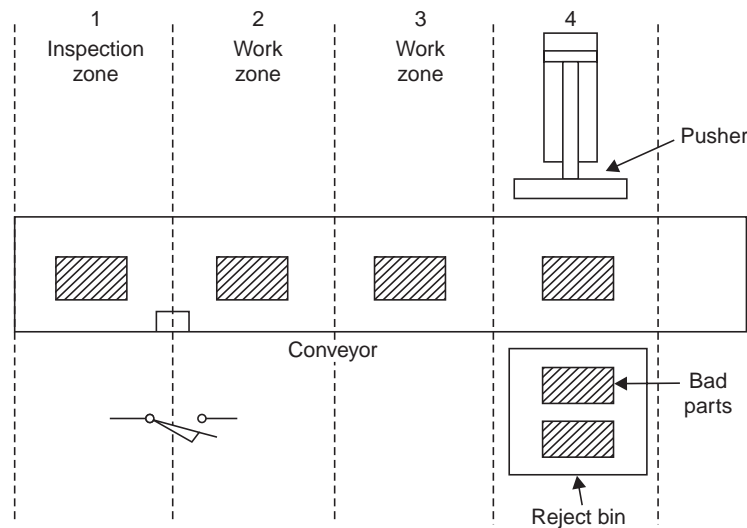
Plan layout of a conveyor inspection system
